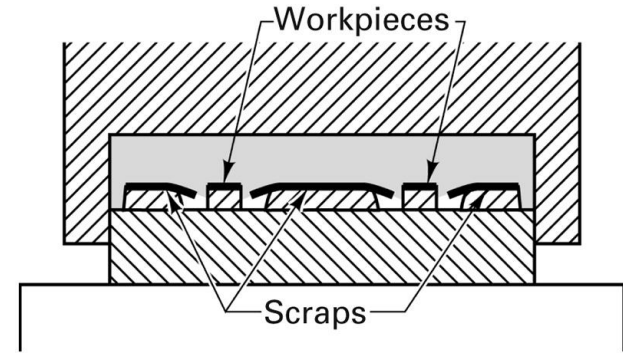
Method of blanking sheet metal using the Guerin process.
